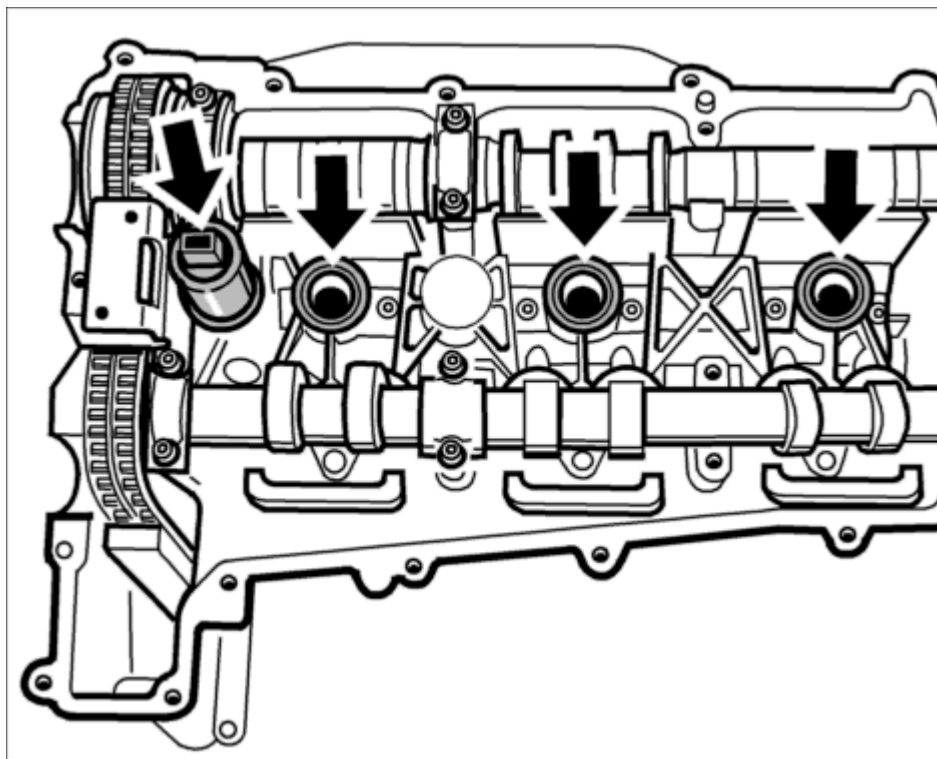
Spark plug slot seals and solenoid hydraulic valves
